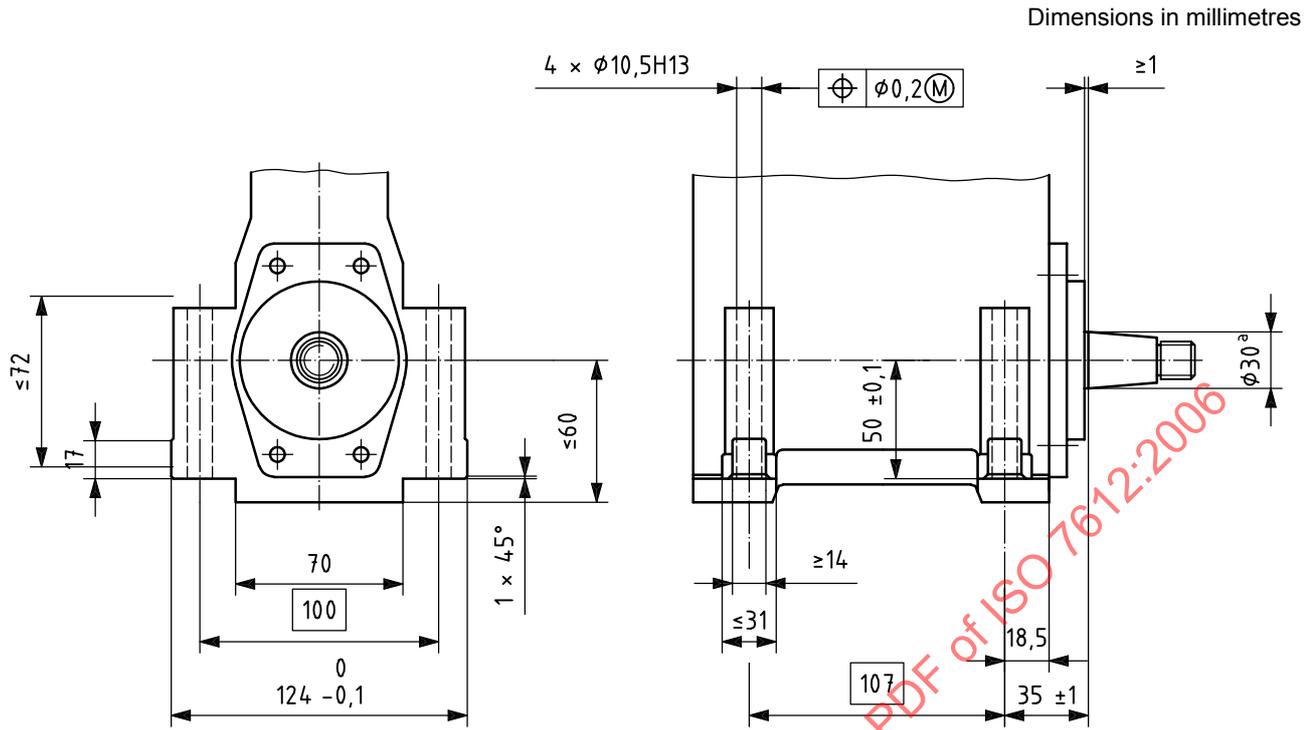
Base-mounted in-line fuel injection pump — Type 4
